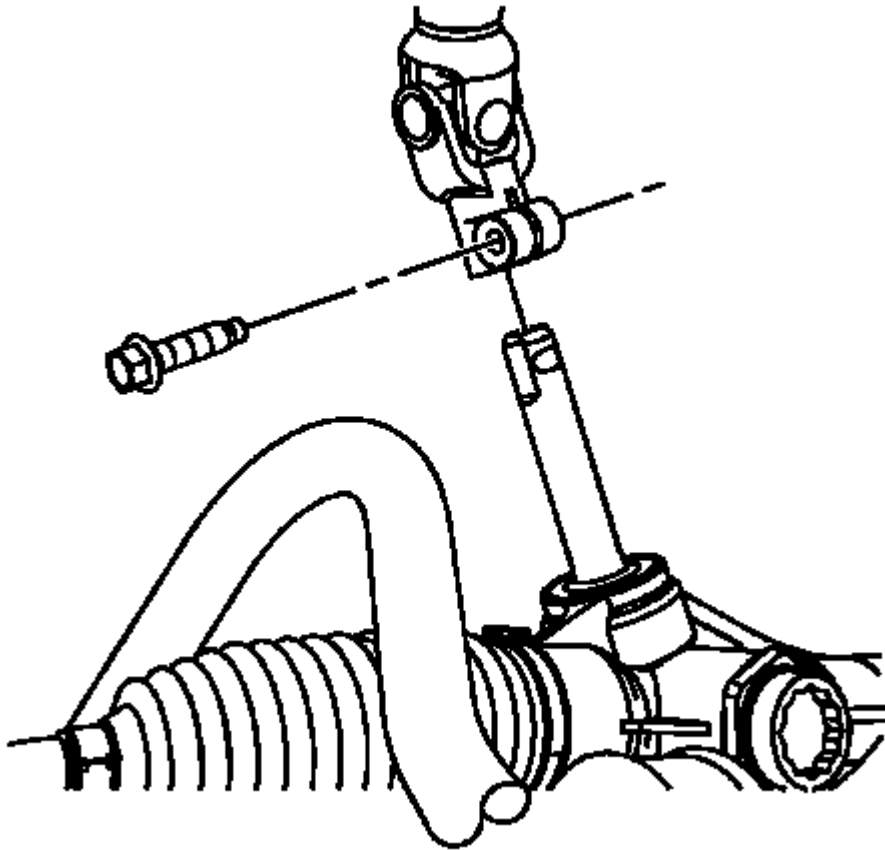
View Of Intermediate Shaft To Steering Gear Pinch Bolt
